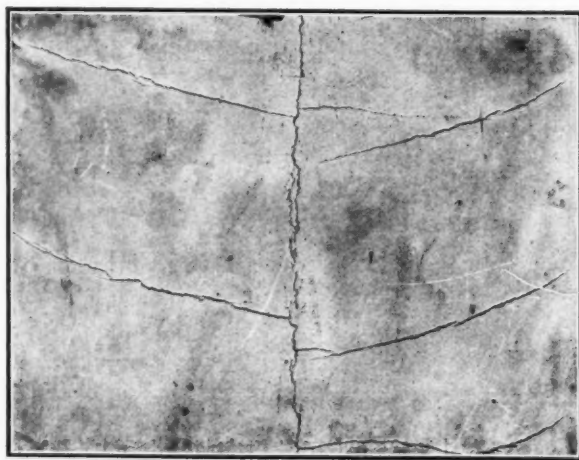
Section of Fractured Forging Made from Perfect Bloom.
